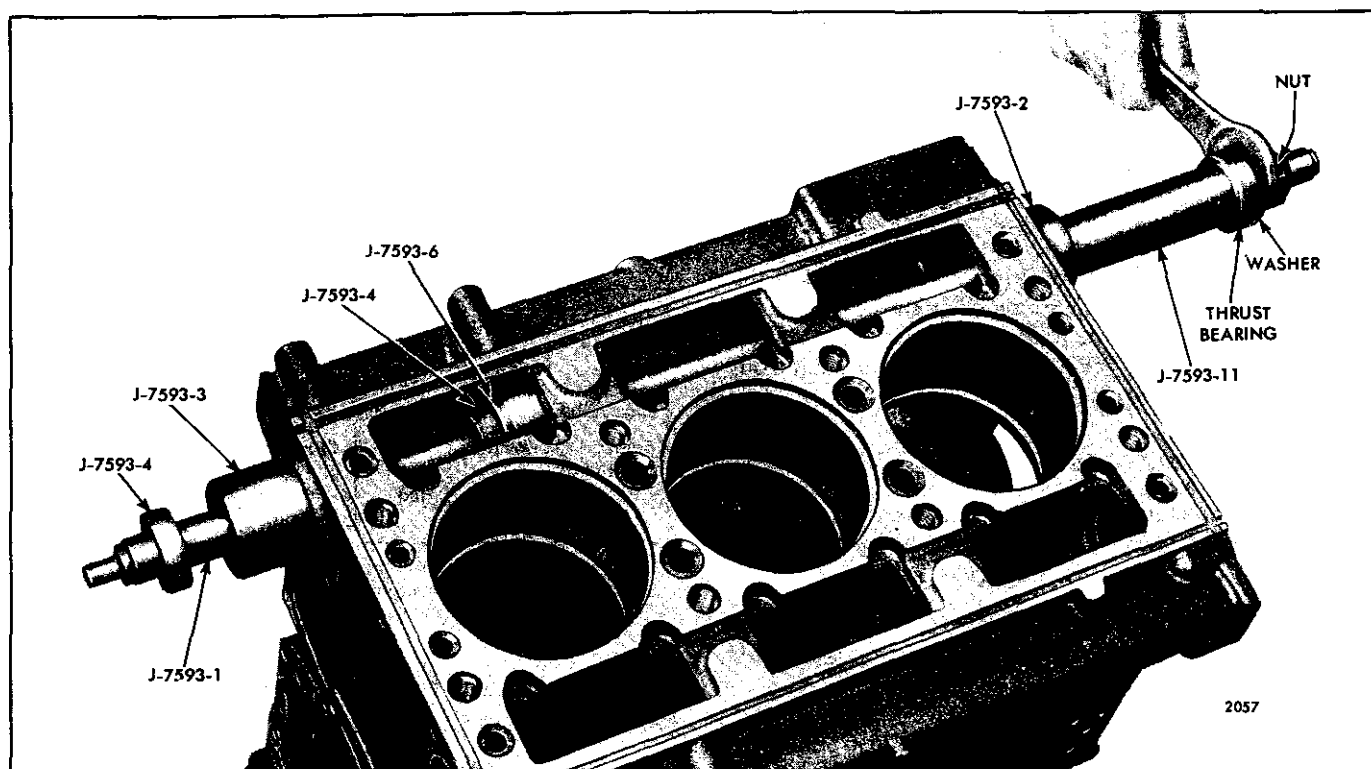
Installing Intermediate Camshaft Bearing Using Tool Set J 7593-03
